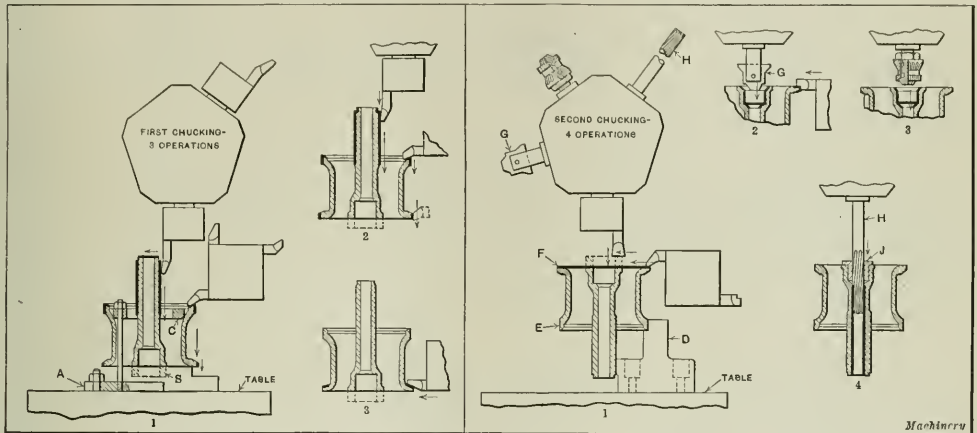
Tooling Lay-out of the Two Chuckings required to machine a Main Throttle Valve for a Locomotive
